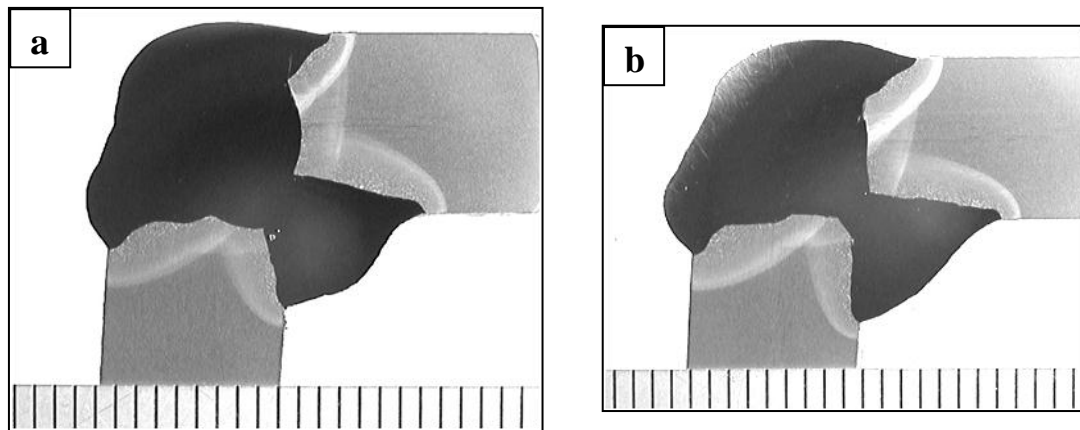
Macrophotographs of the 5 pass corner welds deposited with flux-cored consumable; a – “current weld” and b – proposed “optimised weld”. Note: scale is in millimetres.
